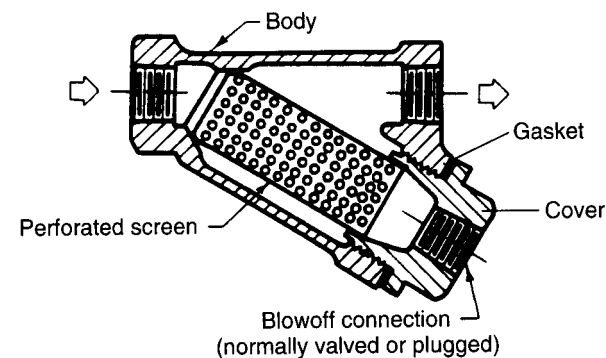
Y-type strainer. Courtesy Spirax Sarco, Inc.
